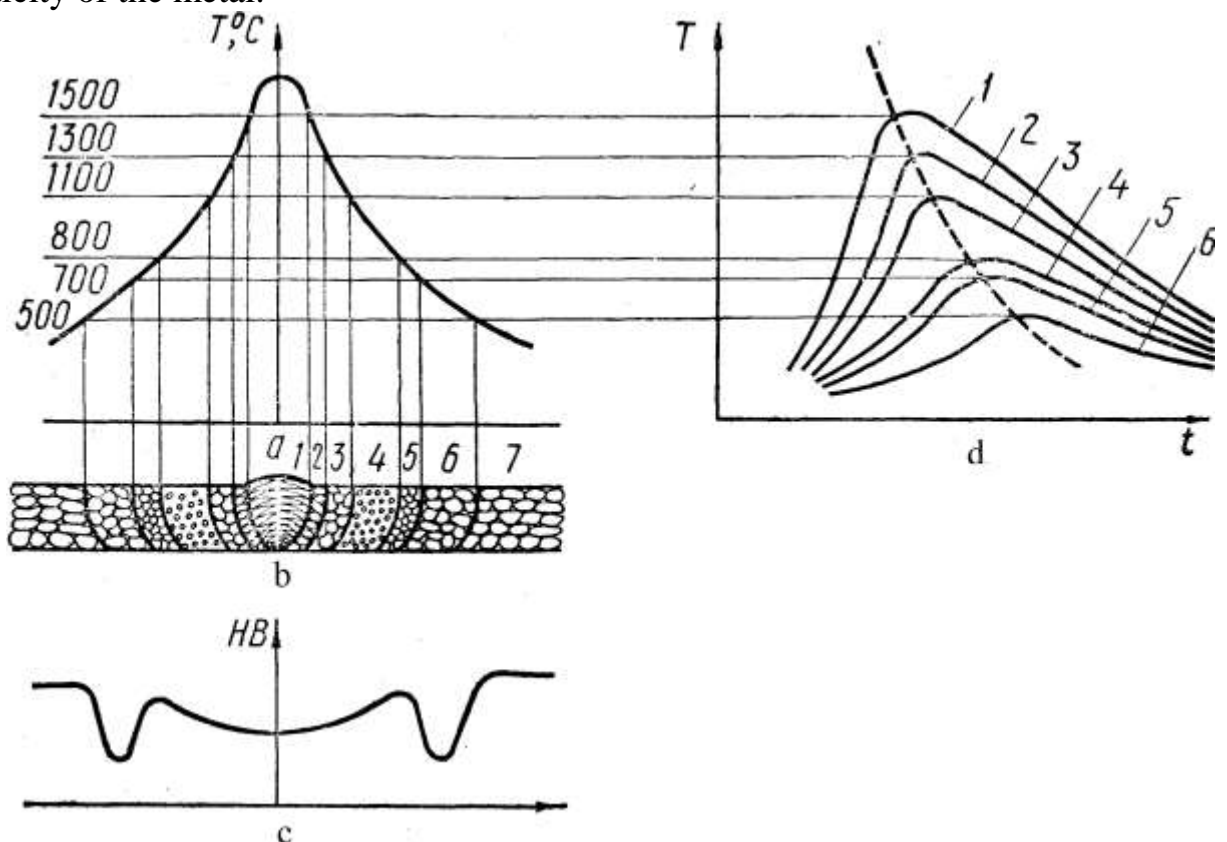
Thermal cycle and scheme of changes in the structure and properties of a welded joint of low-carbon steel during single-pass welding:
